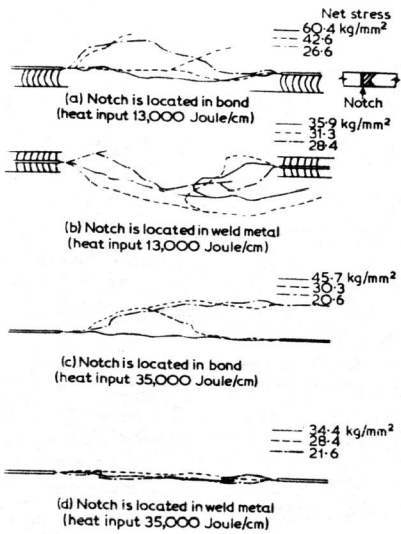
Crack path in welded specimen for HT80 (Steel L in Table 2).
